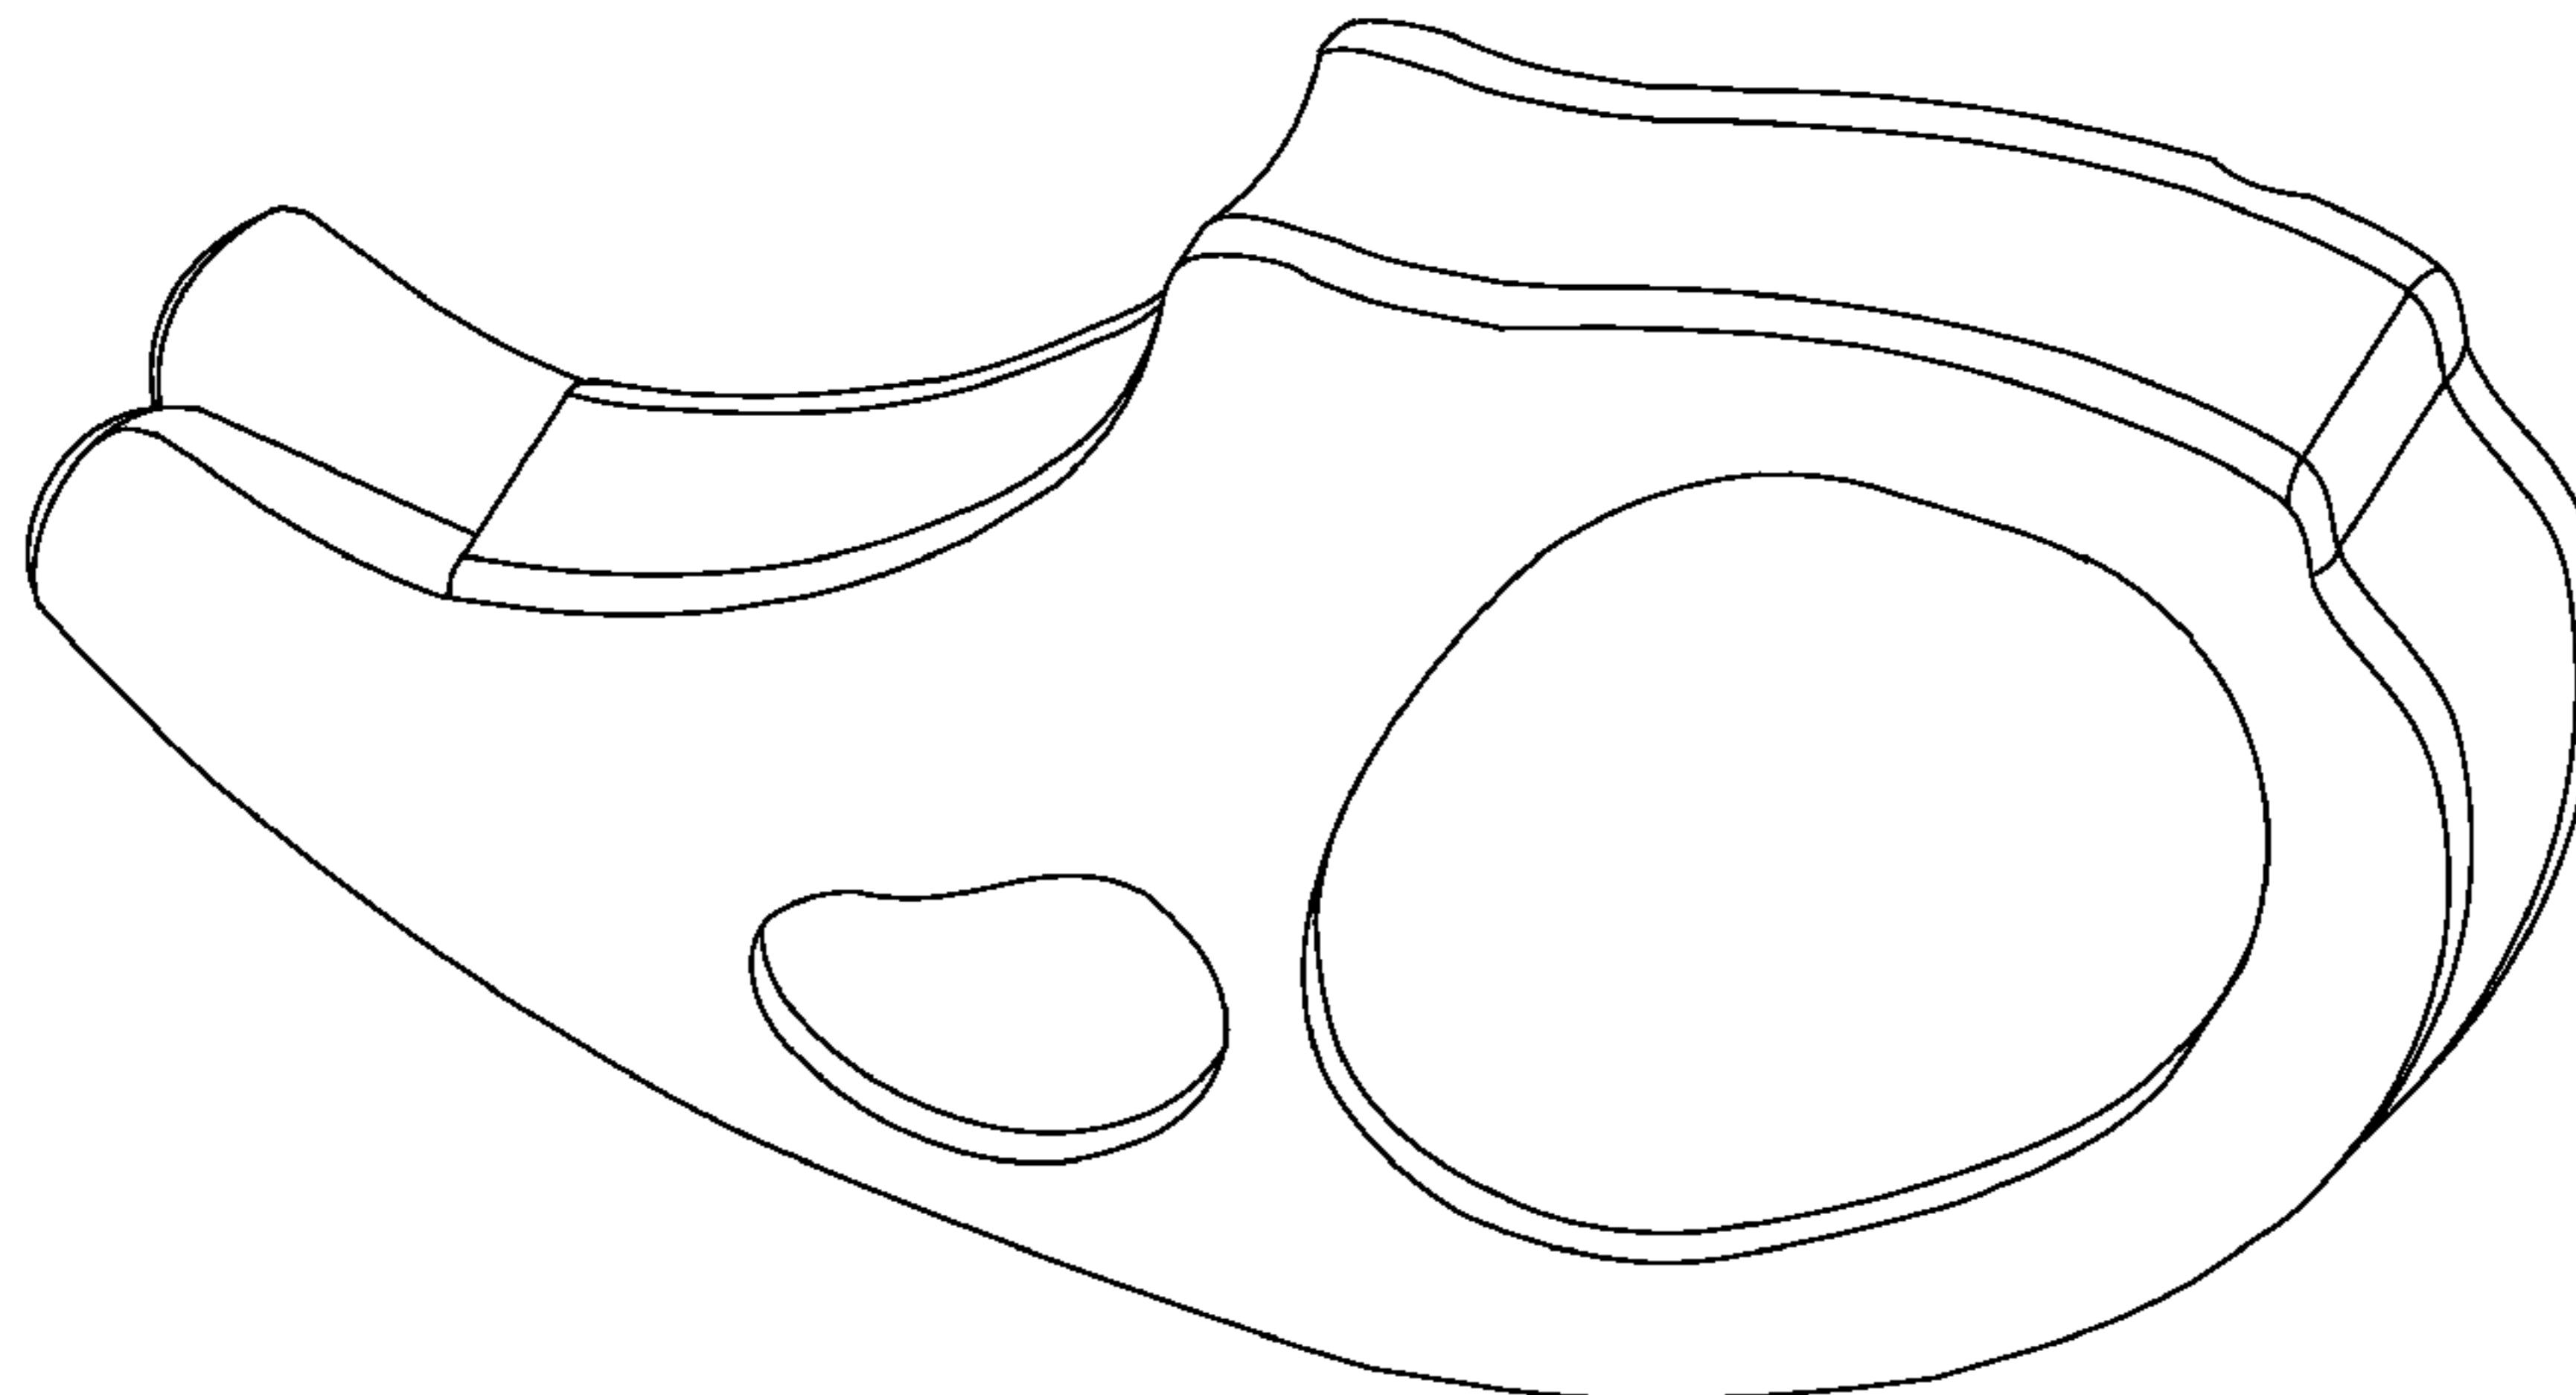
is a bottom plan view of the embodiment of FIG. 9;
